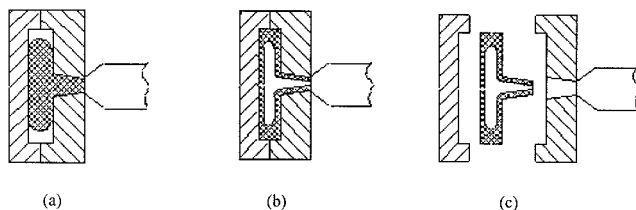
Schematic of gas-assisted injection-molding process: (a) partial polymer melt filling; (b) injection of compressed gas; (c) demolding after packing and cooling.
